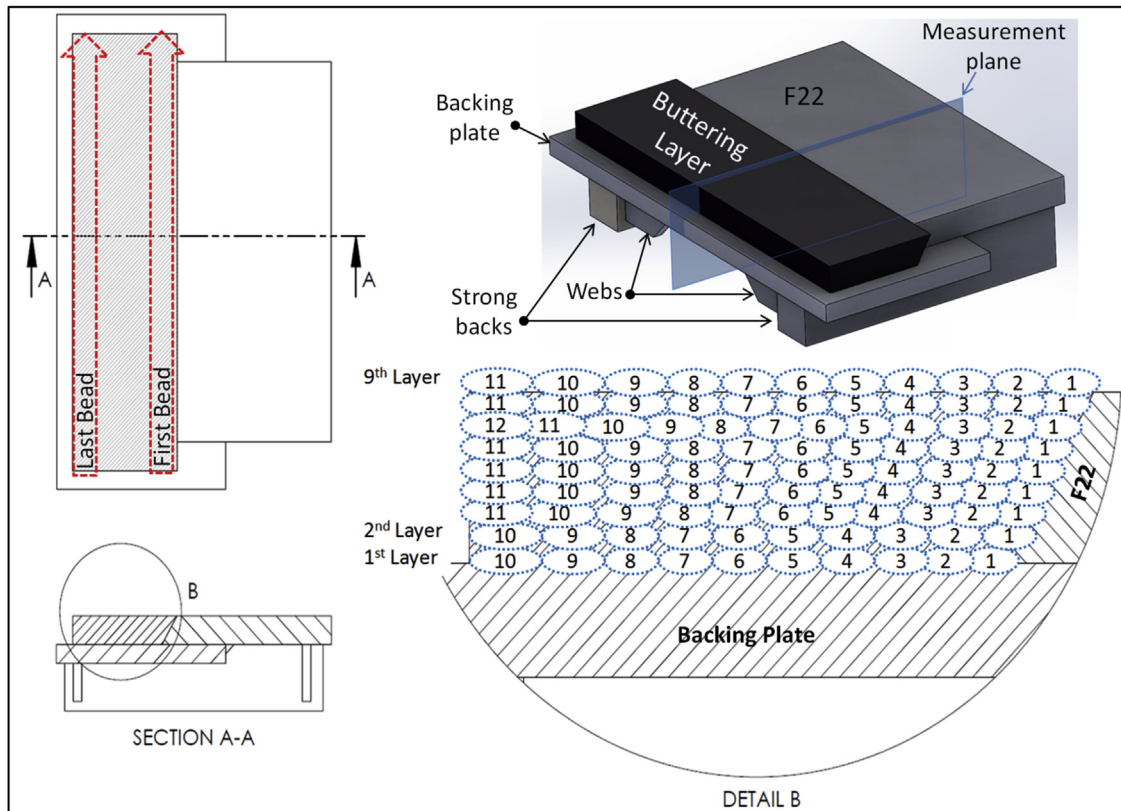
Deposition sequence for buttering process, which was carried out by submerged arc welding.
